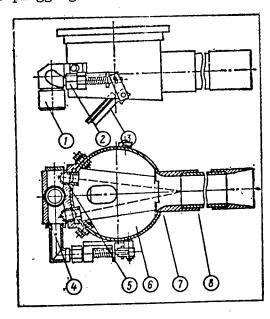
Double-Pipe Hydraulic-Vacuum Mixer
